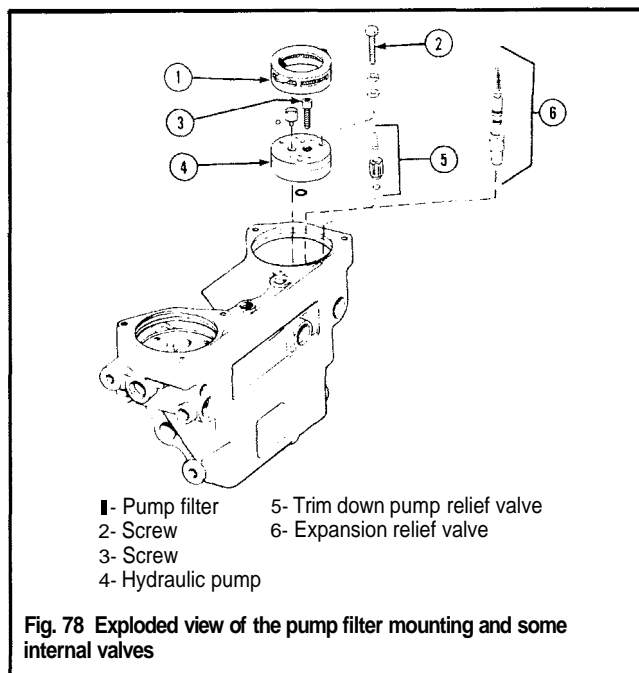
Exploded view of the pump filter mounting and some internal valves
